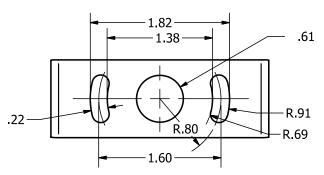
CAMERA MOUNTING HOLE PATTERN (DIMENSIONS: INCHES)
